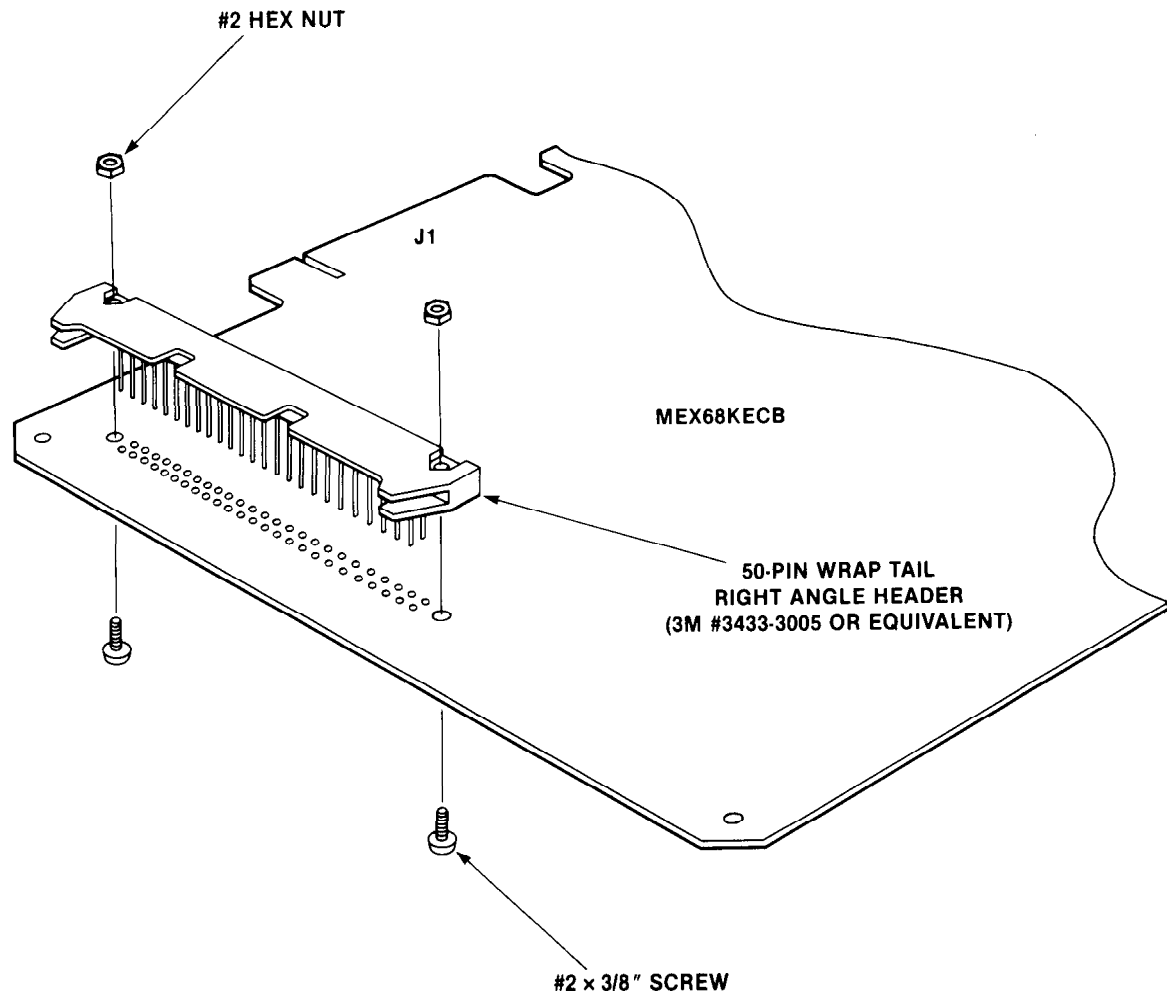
Auxiliary I/O Header Mounting Detail
